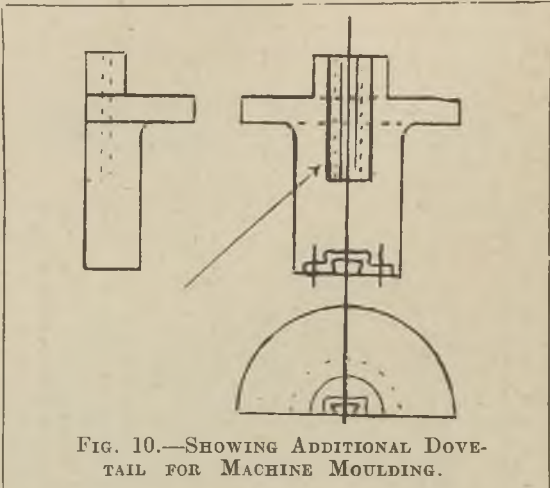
SHOWING ADDITIONAL DOVE-TAIL FOR MACHINE MOULDING.
